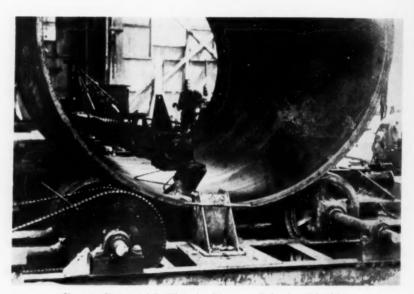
Boom with Weir in Pipe on Spinning Machine
